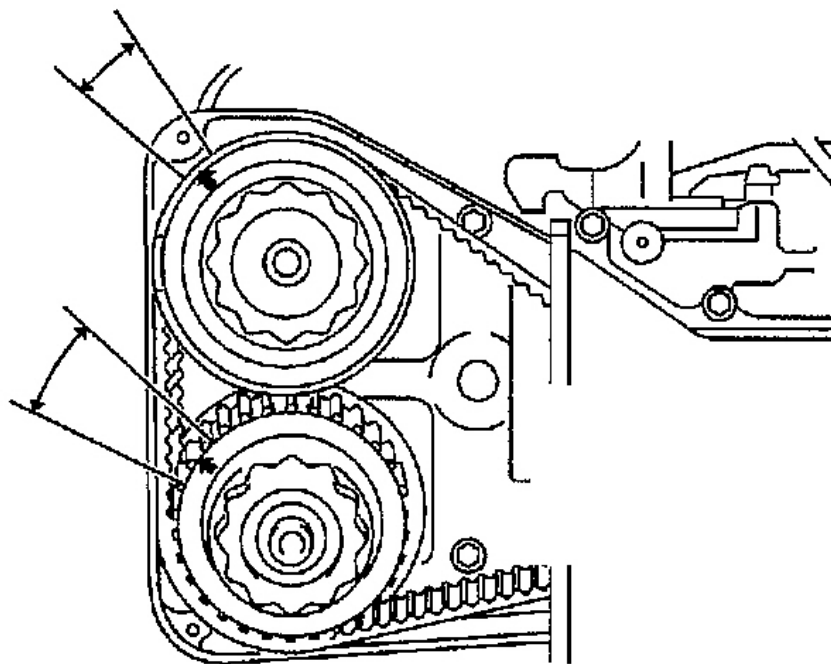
Setting Arrow Mark On Camshaft Sprocket To Position
